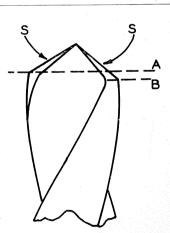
B Drill with proper lip clearance. Heel line, B, is lower than cutting lip line, A. Distance between A and B measures amount of lip clear-
